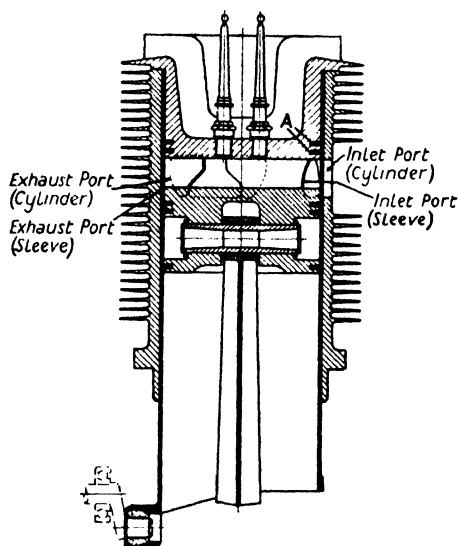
Cross-section of air-cooled sleeve-valve cylinder.
